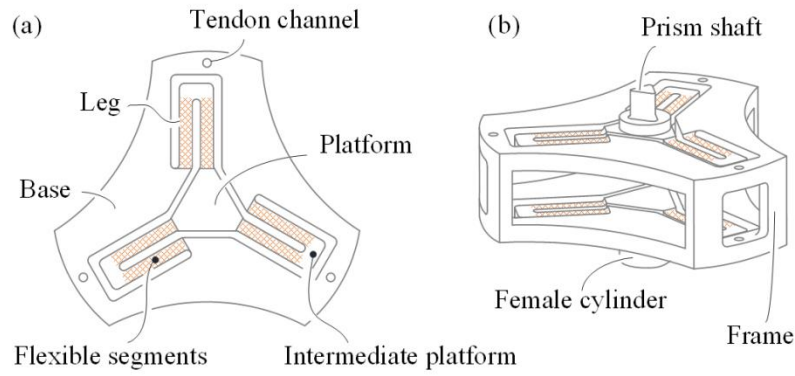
Schematic of double-layer modular segment. (a) Top view; (b) Side view. The pattern-filled parts represent the flexible segments.
